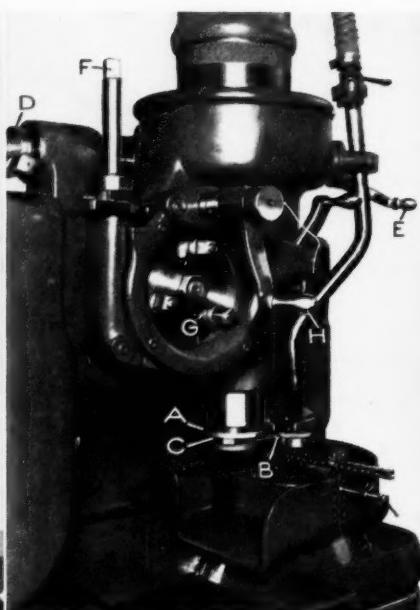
Gage Used for Positioning Cutter in Relation to Work-holding Fixture
